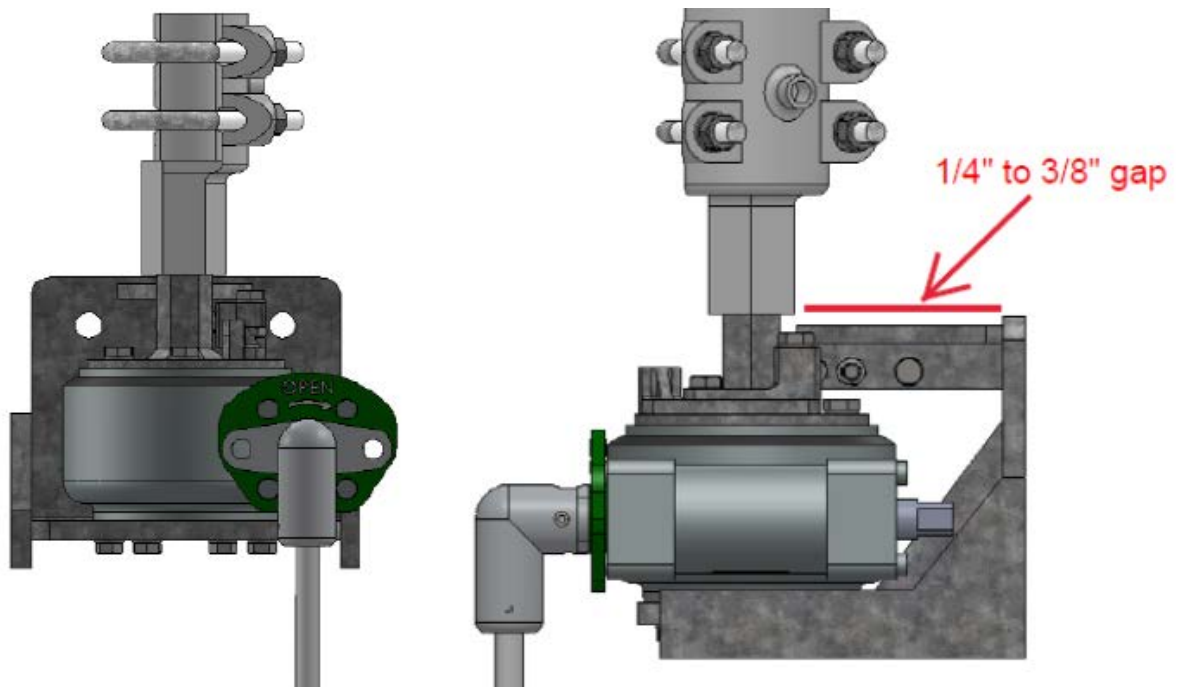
Type HOGO (High Output Geared Operator) Front View
